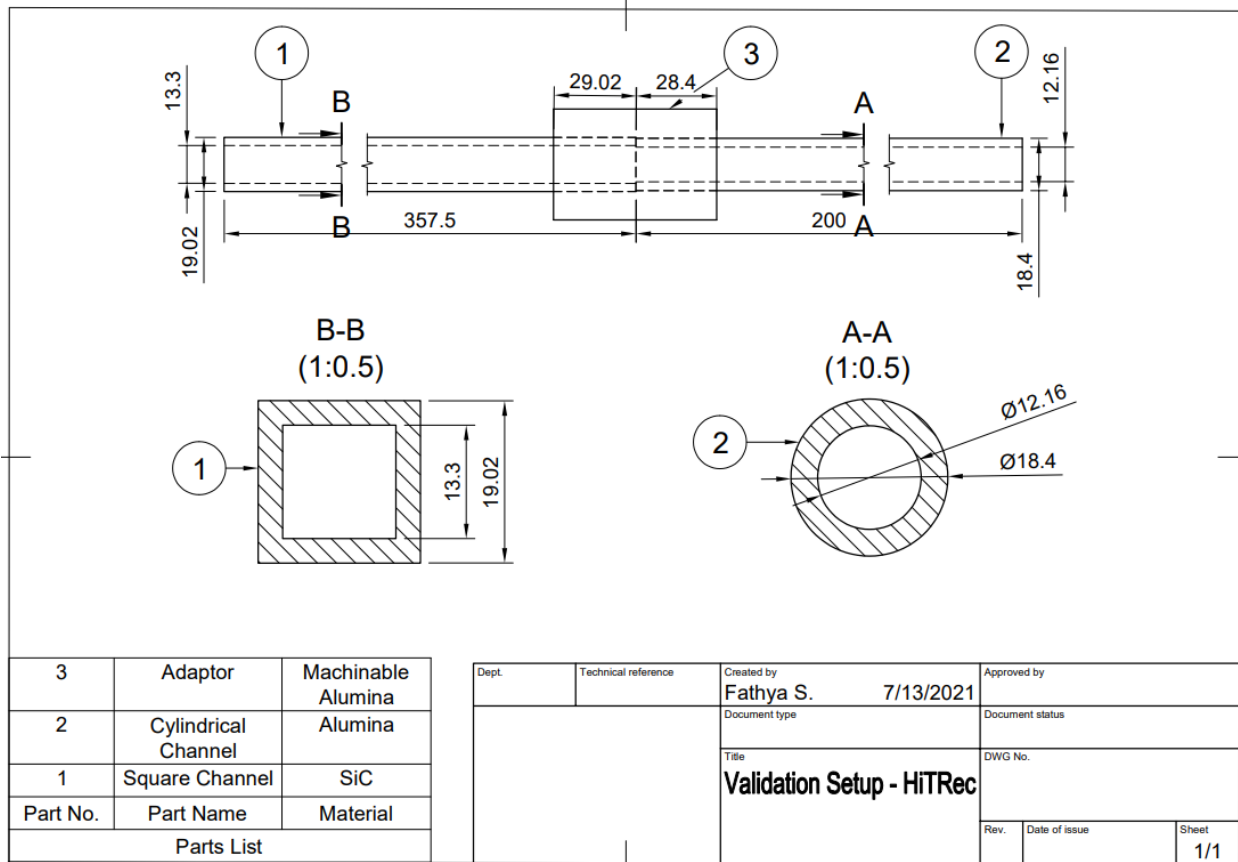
CAD drawing for receiver assembly needed for first stage of validation (mm units)
